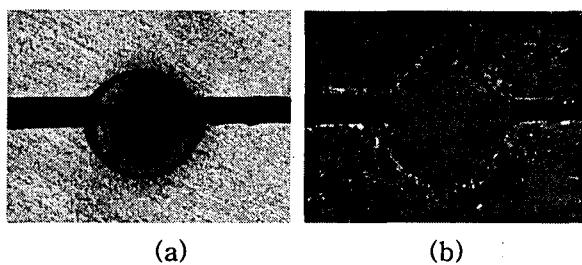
Front view of self-controlled contract tip-(a) before welding b) after 4 hours welding
